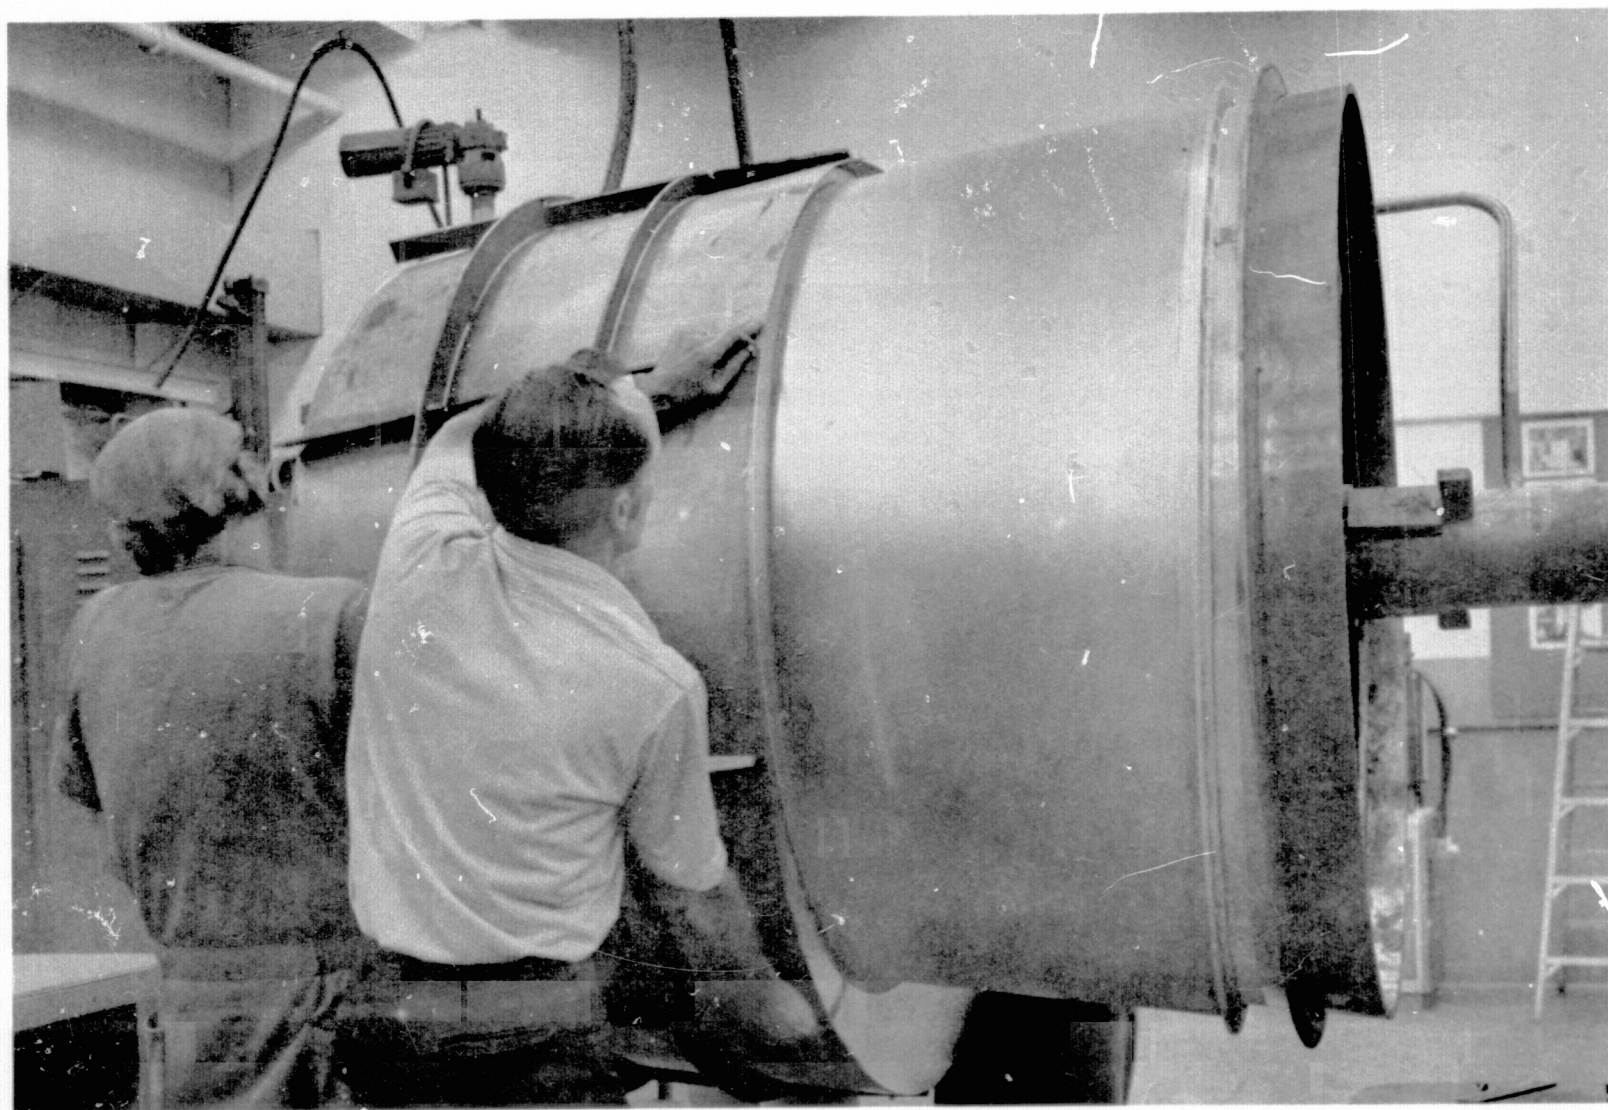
Weld Sealing JT8D Refan Brazement in Retort
